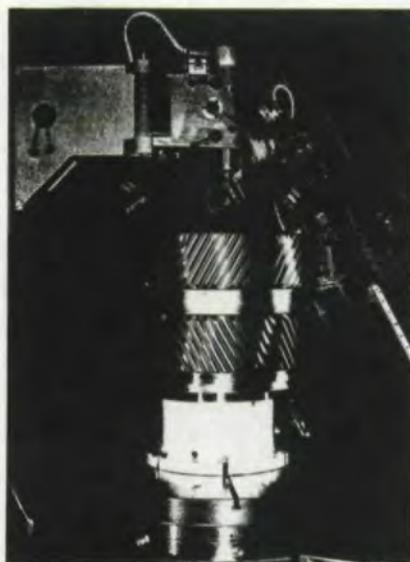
Conical wheel grinder finishing a double-helical gear in one setup.
